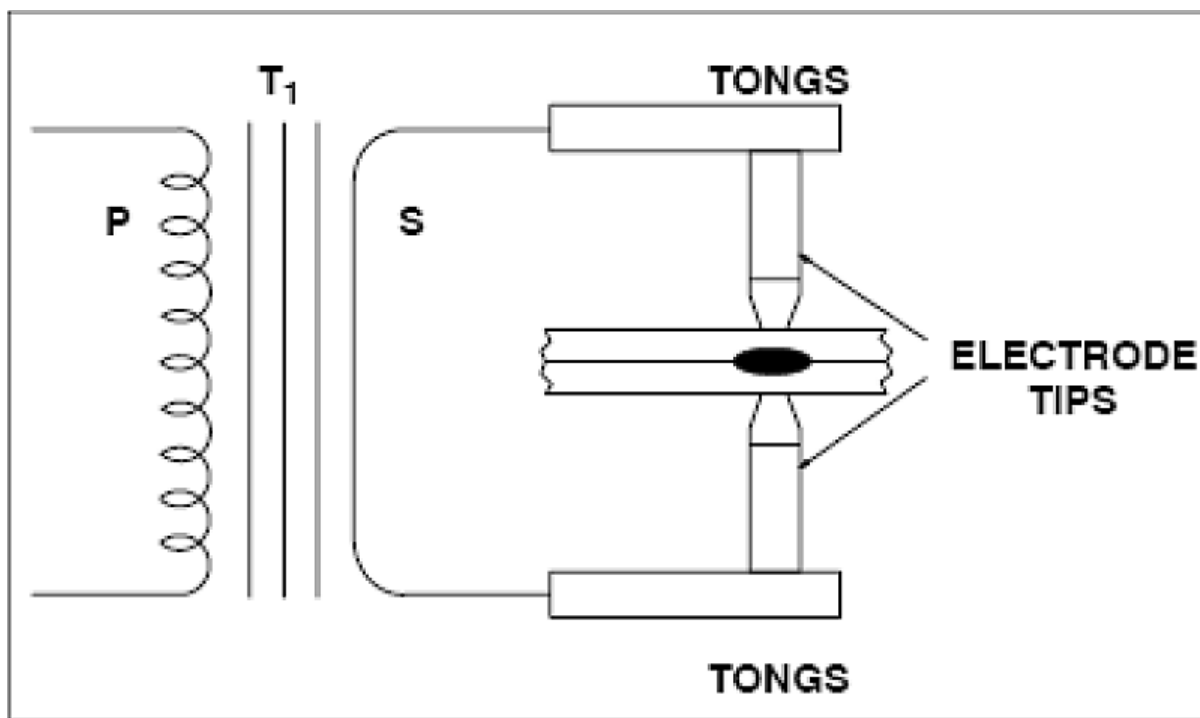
Resistance Spot Welding Machine with workpiece
